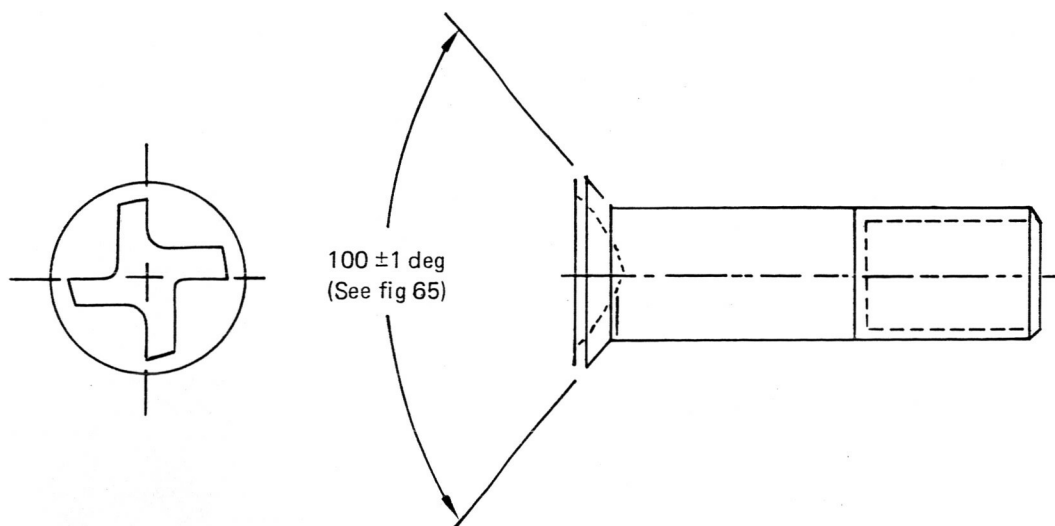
Torque-Set Bolt, 100-deg Flush-Reduced Head
